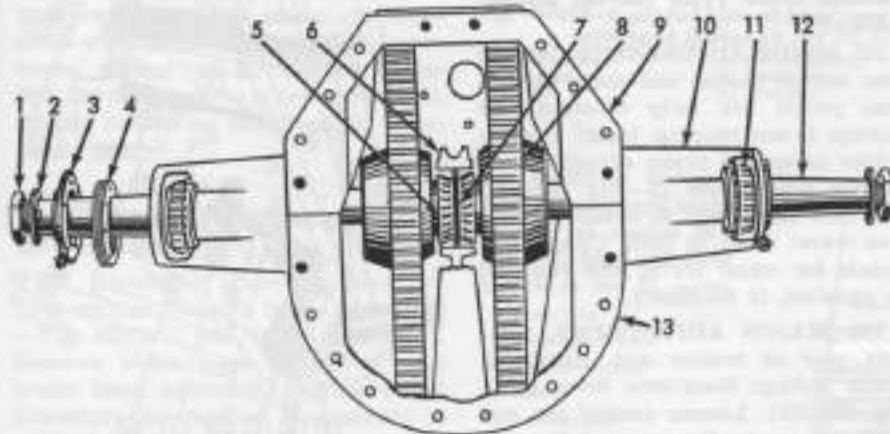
Master gears and rear axles—Models 55, 55D, 55K, 55LP, 201, 202, 203 and 203G.
